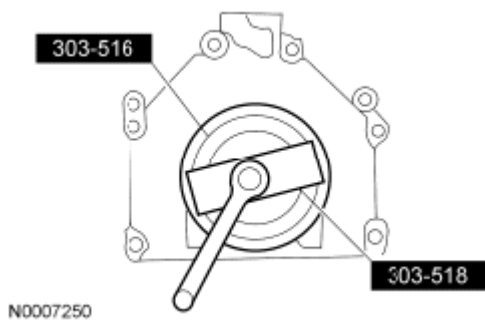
Installing Crankshaft Rear Oil Seal Using Special Tools
